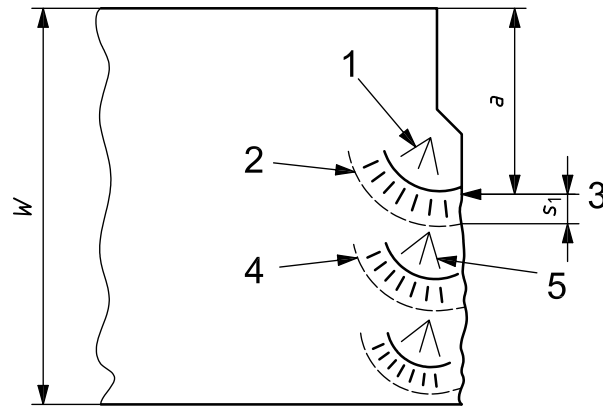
Post-test sectioning procedure to identify microstructure at fatigue crack in a through-thickness notched specimen
